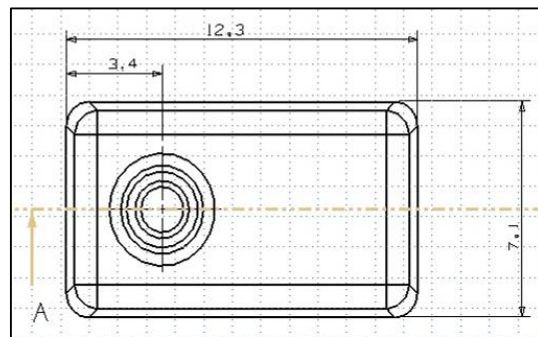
Mechanical drawing: Upside of tube connection (type A and B)
